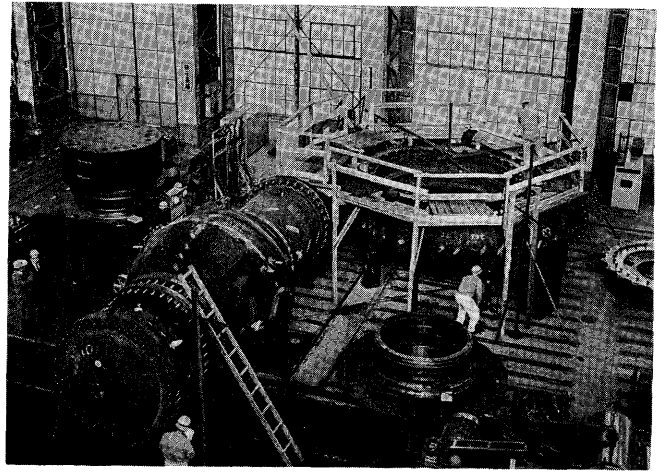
Turbine spiral casing and inlet valve under water pressure test
